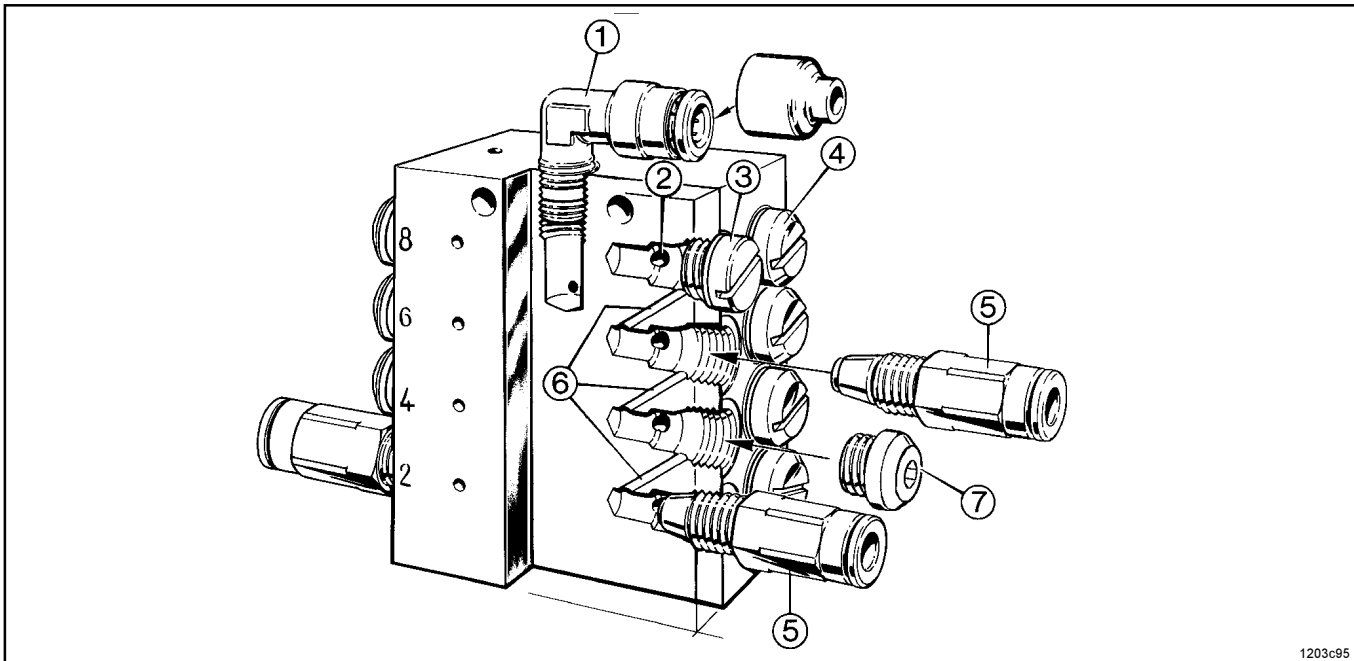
Install the push-in type outlet fittings and the closure plugs in accordance with the dosage
